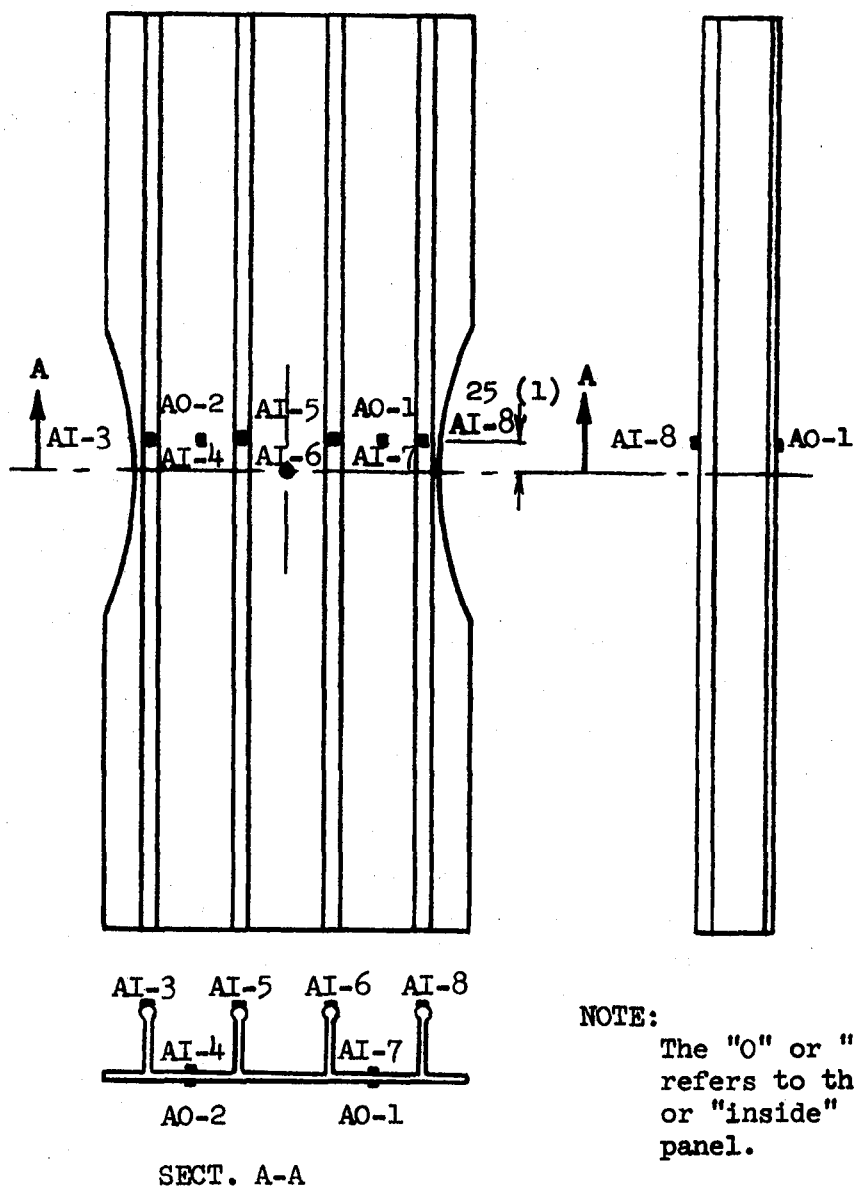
STRAIN GAGE LOCATIONS, PANELS WITHOUT PHOTOELASTIC COATING (DIMENSIONS IN MILLIMETERS AND INCHES RESPECTIVELY)
